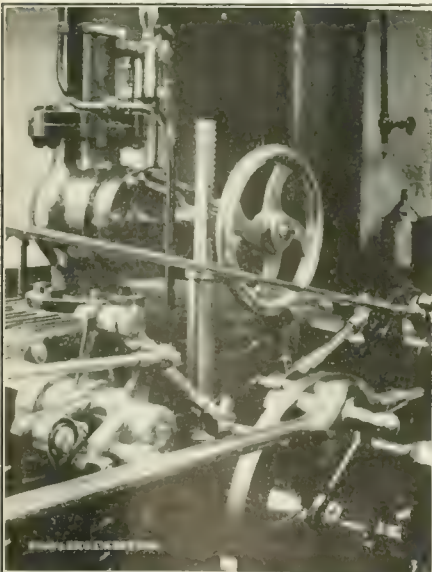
THROTTLE VALVE OPERATED BY AIR PRESSURE.
